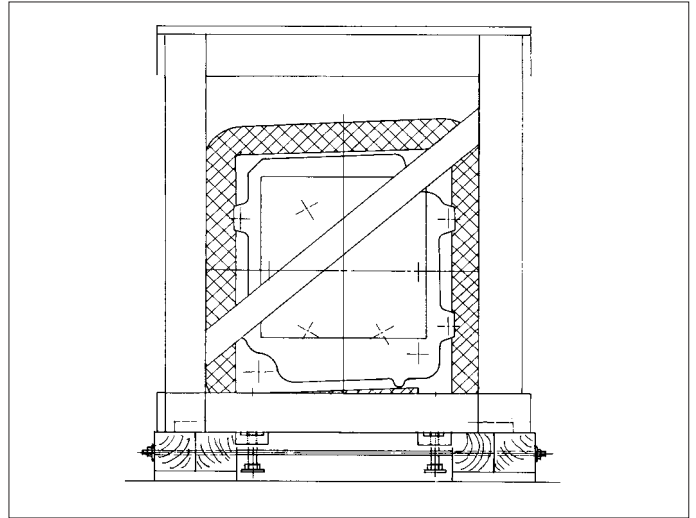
The boiler completely assembled in a crate and on a pallet.
